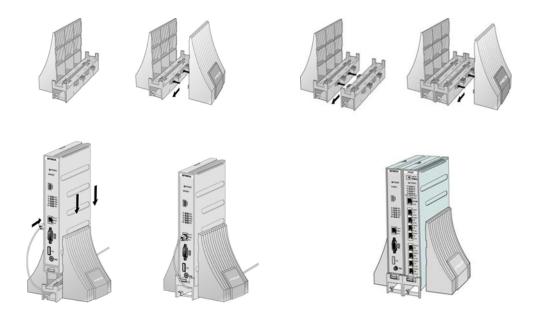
Mounting Module in Desk Mount Holder
